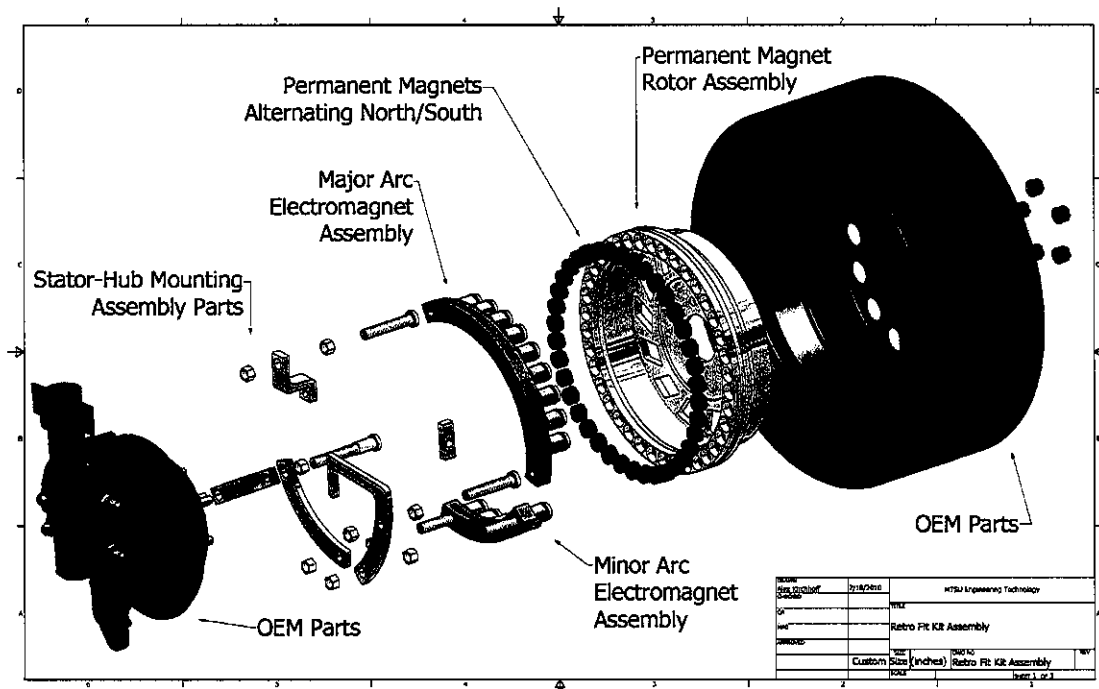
Assembly drawing of brushless DC motor retrofit to integrate electric traction drive into rear wheel of 2005 Chevrolet Impala.
